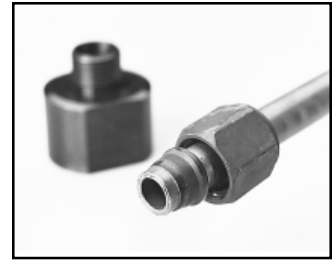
Loosen nut and check for proper pre-set. Use inspection criteria described below.
